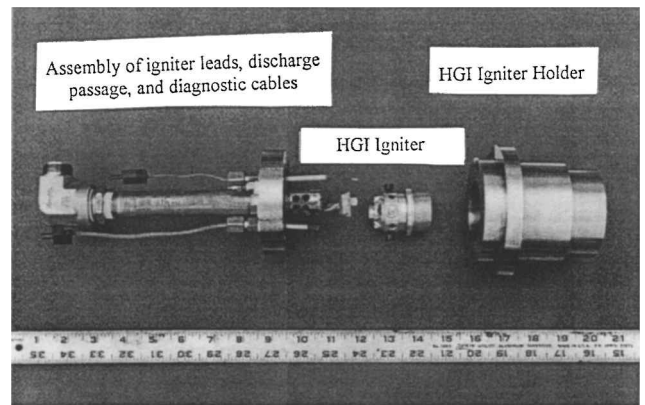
Photograph of the exploded view of the HGI igniter housing and base plate.
